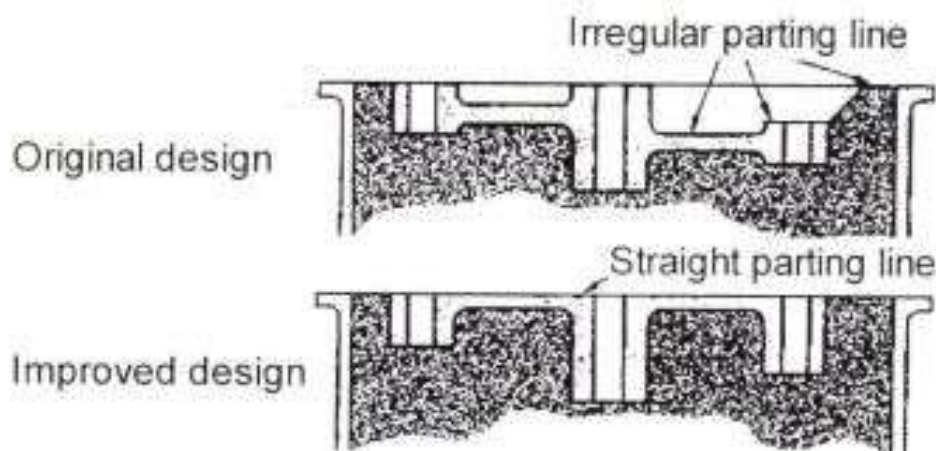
Redesign of a casting by making the parting line straight to avoid defects
